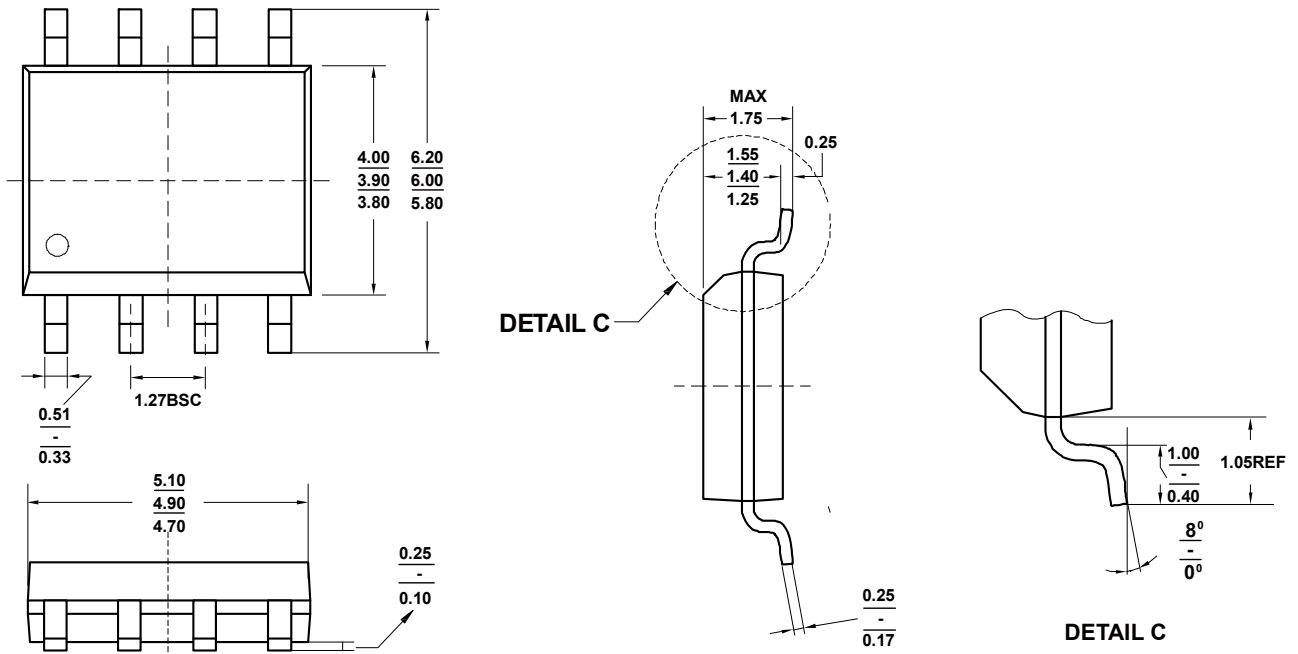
8-Lead SOIC Package Dimensions shown in millimeters
